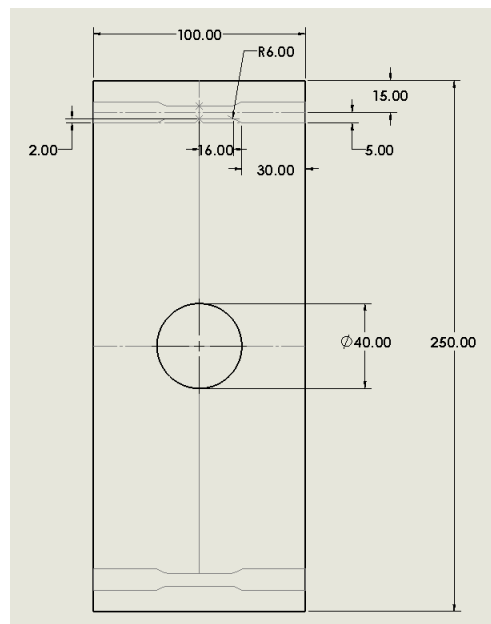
SolidWorks drawing of tool path used in wire EDM for 40 mm hole diameter (20 mm notch radius) plate of sheared-edge specimens.
